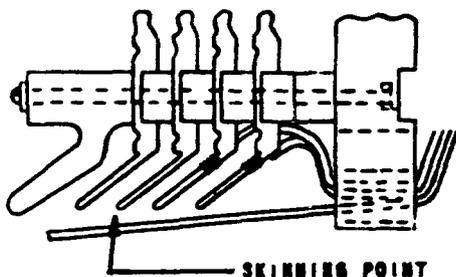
SKINNING POINT DISTRIBUTING FRAME
